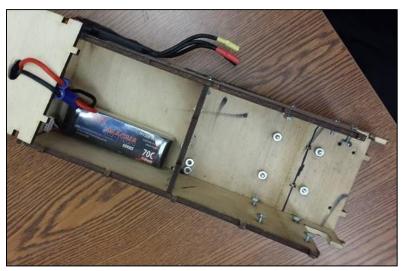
Internal Housing for Components with Bolt and Nut Setup
